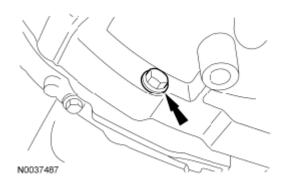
Locating Bellhousing-To-Oil Pan Bolt Courtesy of FORD MOTOR CO.
